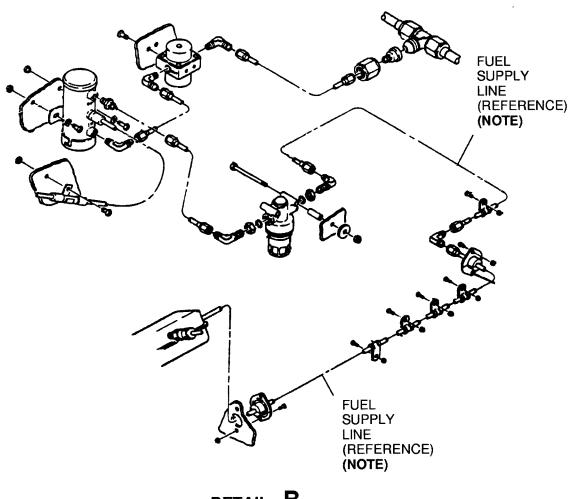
Cabin Heater Fuel Line Inspection (Sheet 1)
